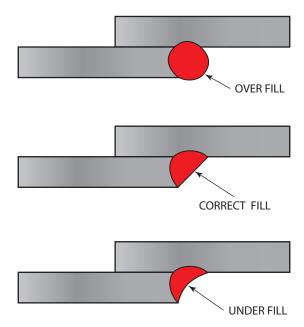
Correct fillet weld size for overhead welds.
